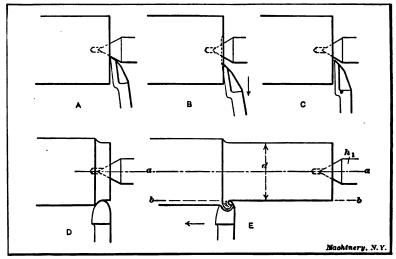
Facing End with Side Tool and Turning Work Cylindrical
